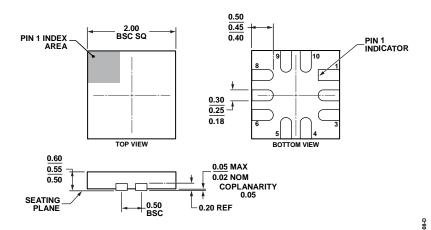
10-Lead Lead Frame Chip Scale Package [LFCSP_UQ] 2 mm × 2 mm Body, Ultra Thin Quad (CP-10-11) Dimensions shown in millimeters
